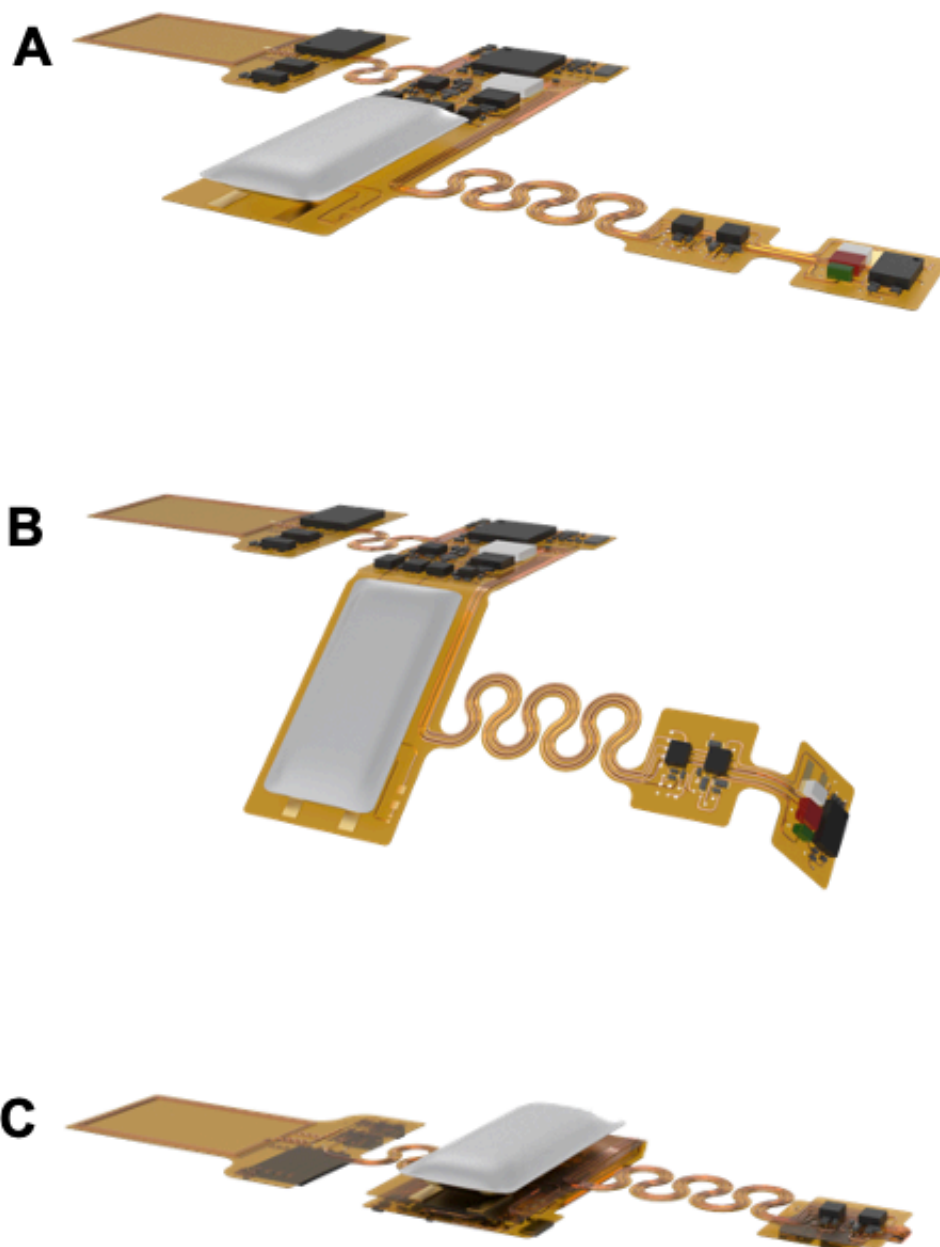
Folding of the full limb device flexible printed circuit board for preparation of encapsulation. 3D-rendering of (A) the unfolded, flexible printed circuit board layout of the limb device, (B) the folding of the circuit board, (C) the final folded flexible printed circuit board, ready for encapsulation within polyorganosiloxane elastomer materials.
